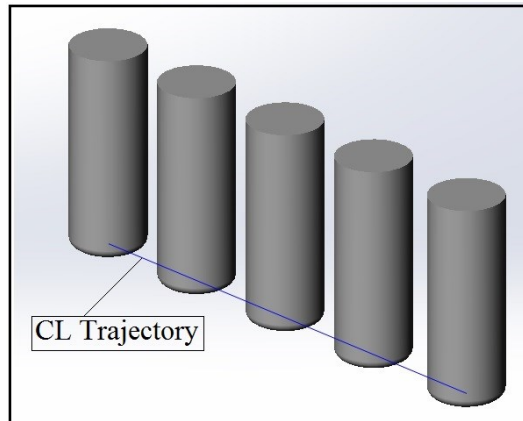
Torus end mill cutter moving through space along CL trajectory.
